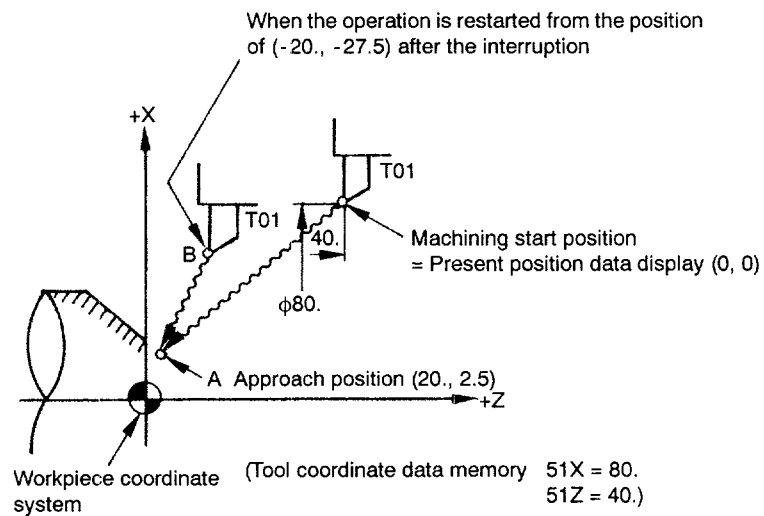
Example of program in which operation in a workpiece coordinate system is interrupted
